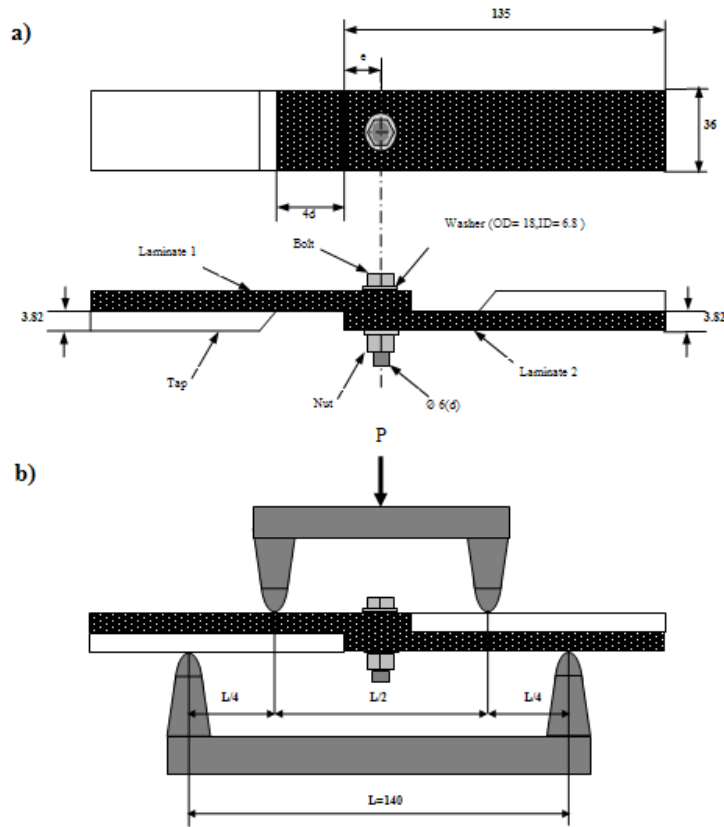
Dimension of bolted joint (a) tensile test (b) four point bending.
